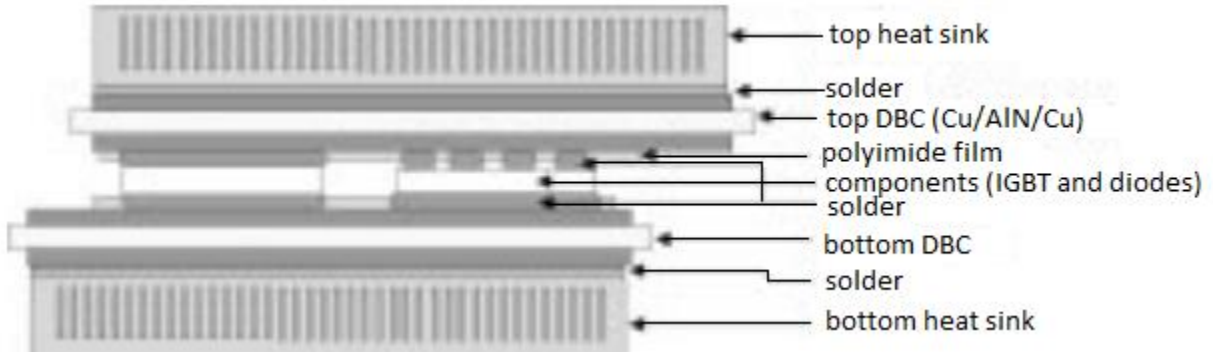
Module with double sided cooling. Heat sinks were brazed to top and bottom heat sinks [65].
